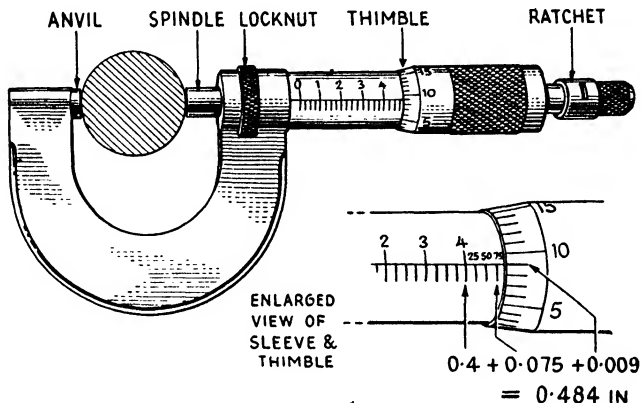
TYPICAL EXTERNAL MICROMETER CALIPER
